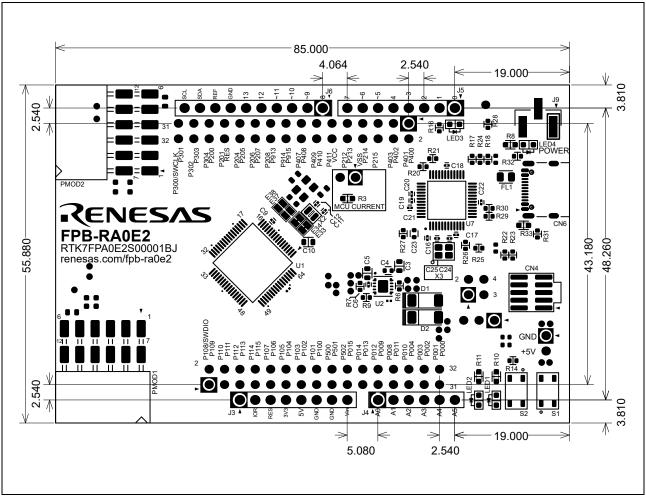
FPB-RA0E2 Board Parts Layout Diagram (Top view)
